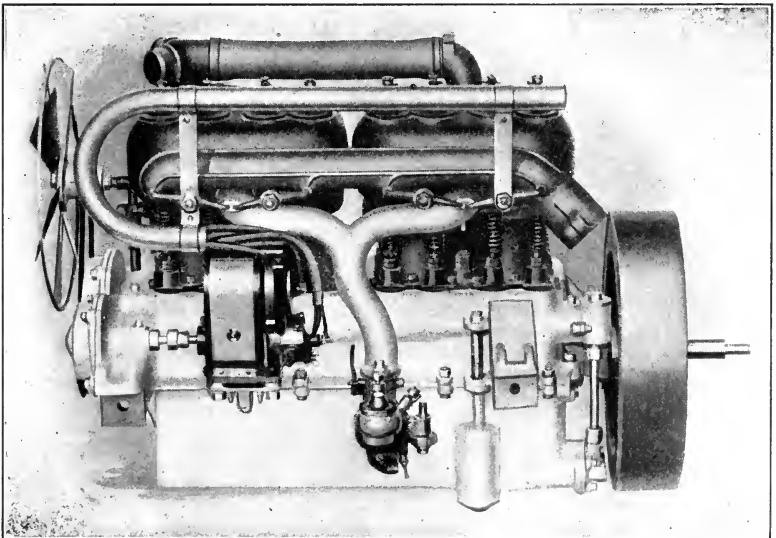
Valve Side Regal Motor Showing Compactness of Design Possible with L Cylinder Construction. Note Manifold Placing and Magneto and Carburetor Location.
